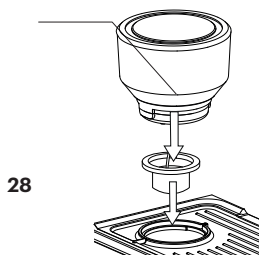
Make sure that the Grinder Head (28) is tightened clockwise according to the graphics marked on the component. Then insert the Bean Hopper (1) and screw it onto the appliance as shown.
